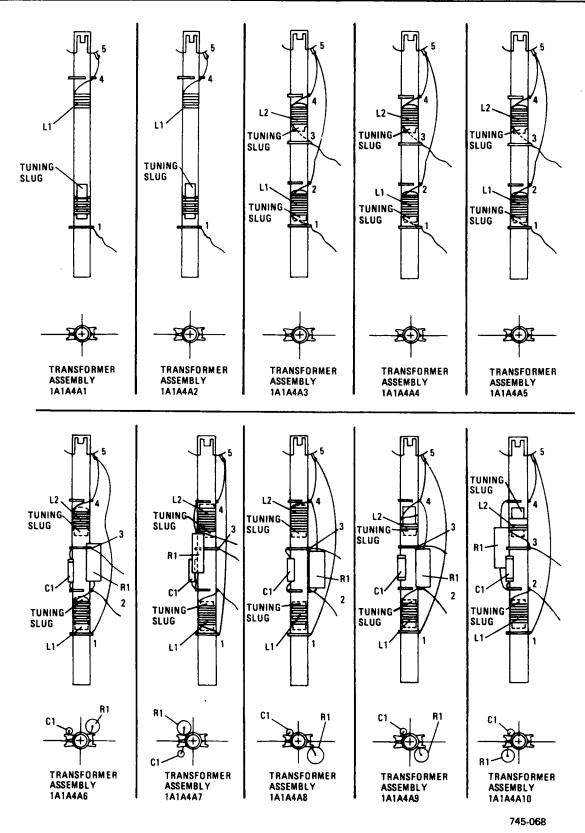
Driver Transformer Assembly 1A1A4, Part No. 0082-3800, Component Locations (Sheet 2 of 3)
